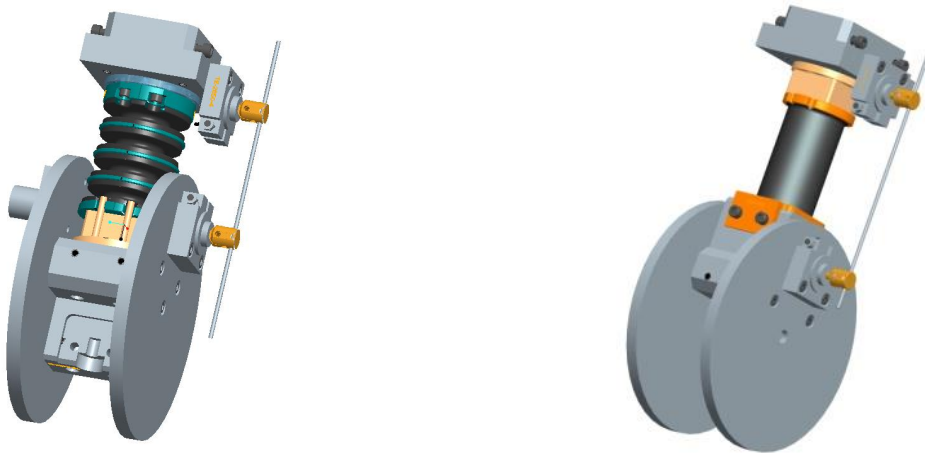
Q10 neck (left) and lumbar spine (right) headform test set-up for frontal test
